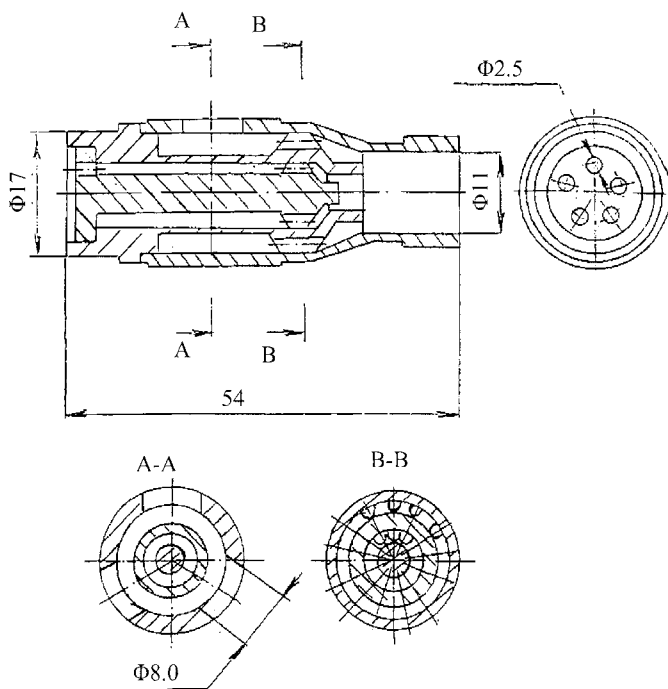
Modified oxygen-kerosene injector with screw conveyor swirler.
